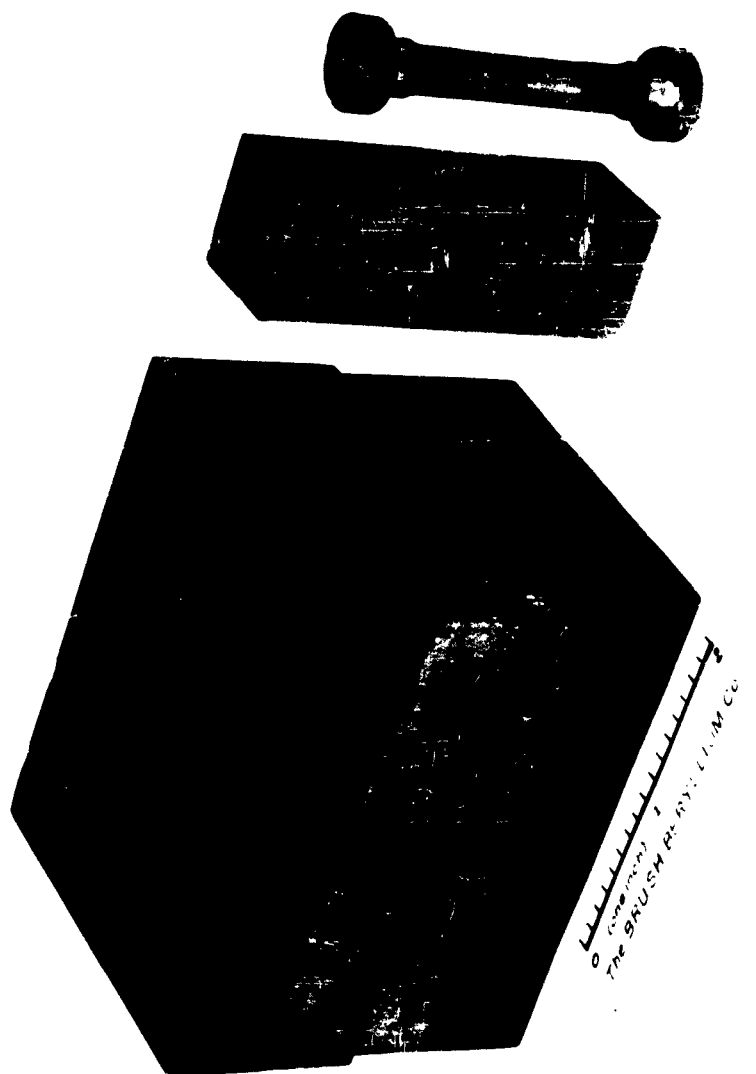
Beryllium blocks brazed together with silver, showing a section ready for heat treatment and a tensile specimen machined after heat treatment.
